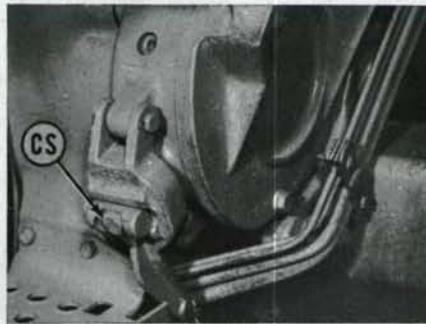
Adjust cap screw (CS) so that brake pedals apply equally and have approximately two inches of free travel. Cap screws are self-locking.
